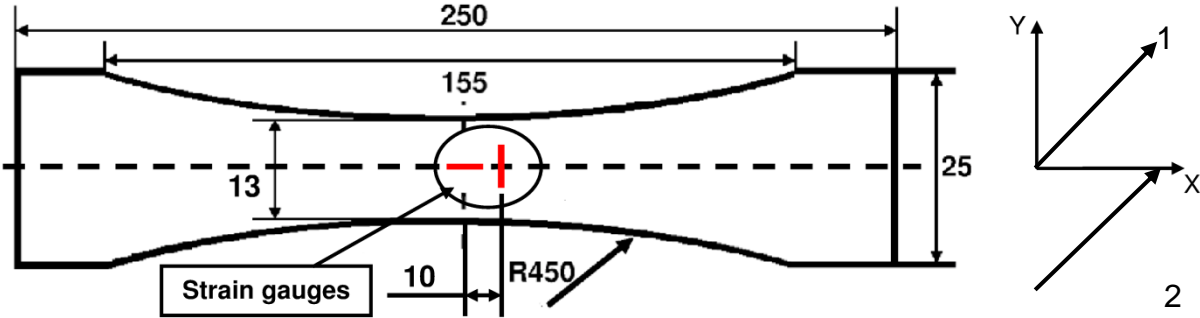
Test Specimen Geometry and Strain Gauge Positions for Shear Test
